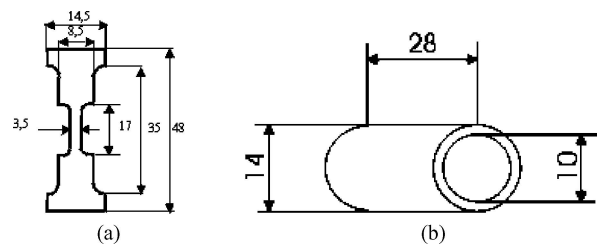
Sample geometry (a) tensile test specimen, (b) hollow cylinder.
